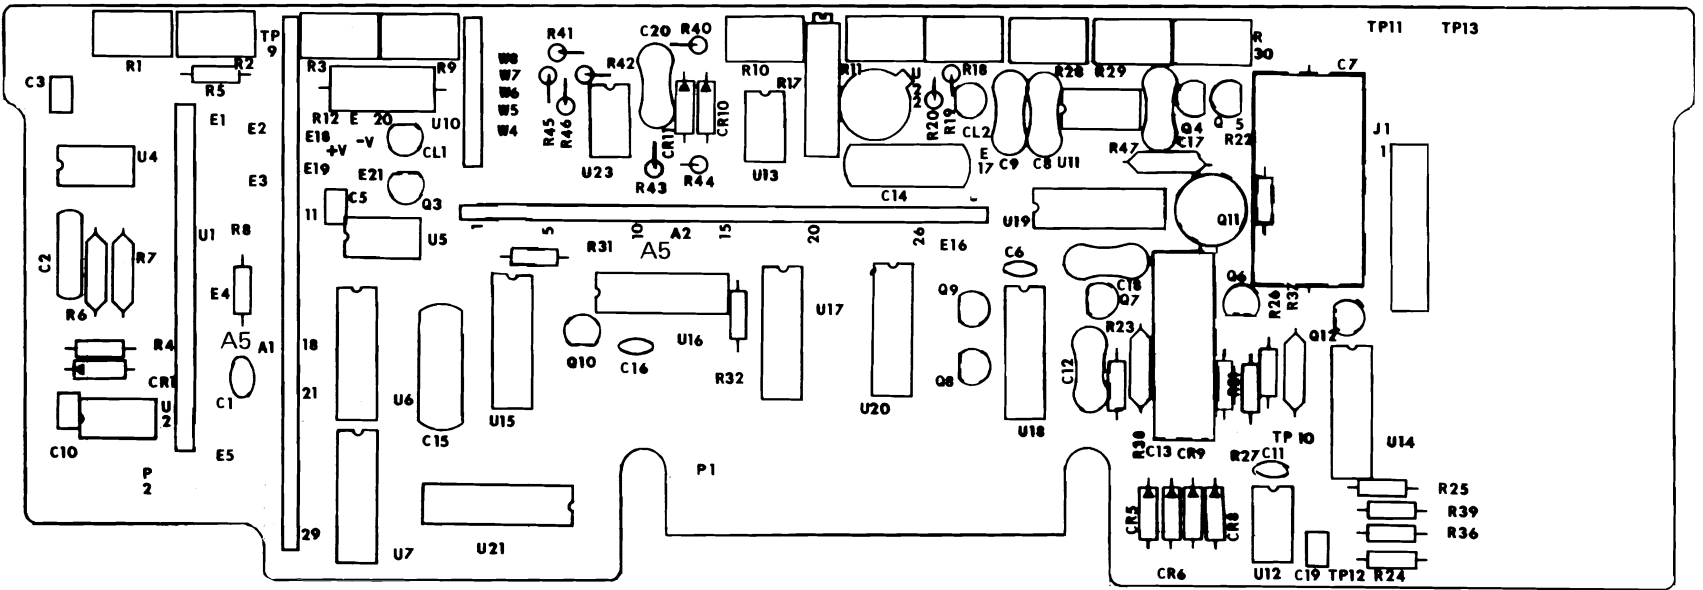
A5 A/D and Ohms Converter PCB Assembly
